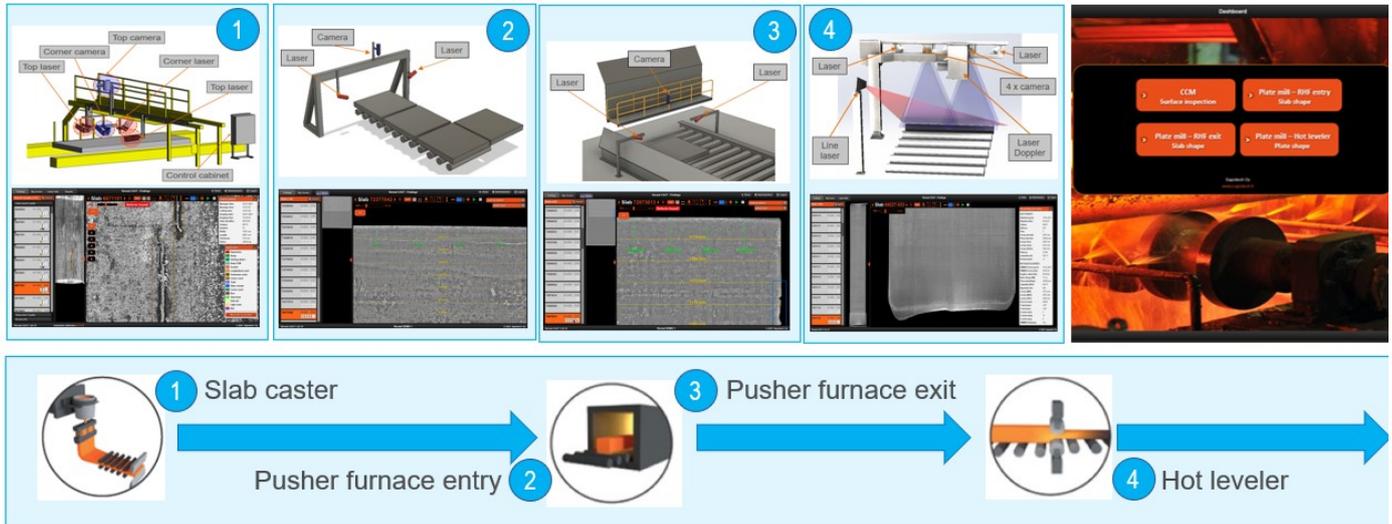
Reveal CAST surface inspection systems in carbon steel production.
